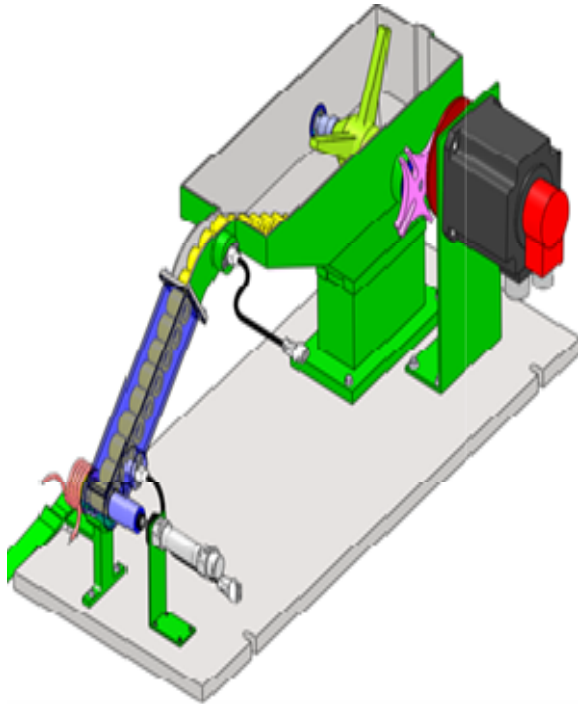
3D model of the automated feed device used for workpieces to be sent to the high frequency induction hardening machine
